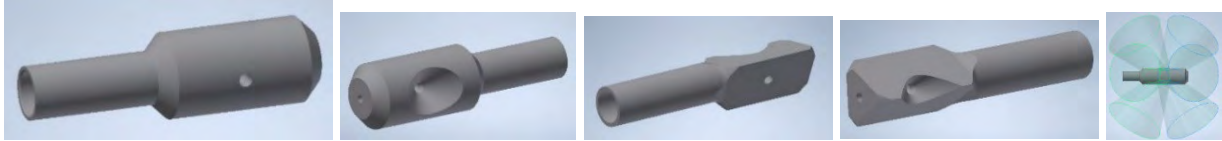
New sample holder designs and heat flux pattern impinging on a redesigned sample holder
